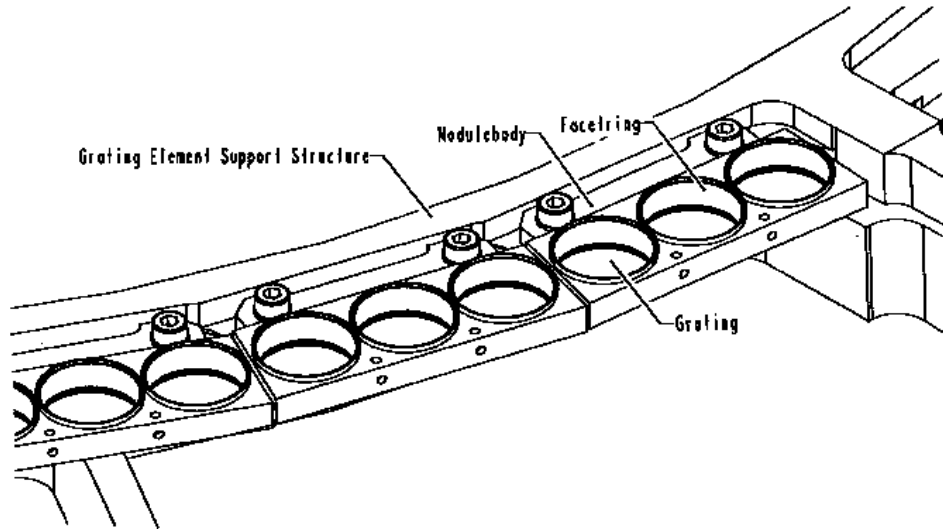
A closeup view of the LETG GESS showing two complete grating modules. Each module has three holes which hold the arrays of grating facets.
